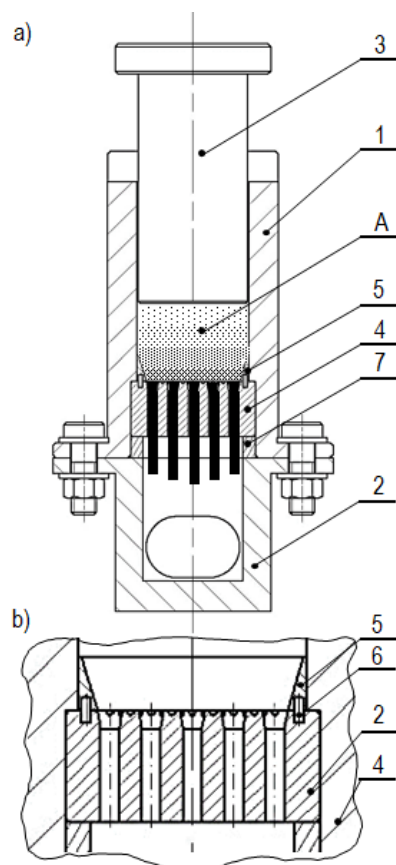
Test assembly a) test assembly cross-section, b) location of the reducer piece in the test assembly: 1 – extrusion tube, 2 – base of the test assembly, 3 – piston, 4 – multi-channel die plate, 5 – tube reducer, 6 – locating pin, 7 – spacing ring, A – compressed dry ice snow
